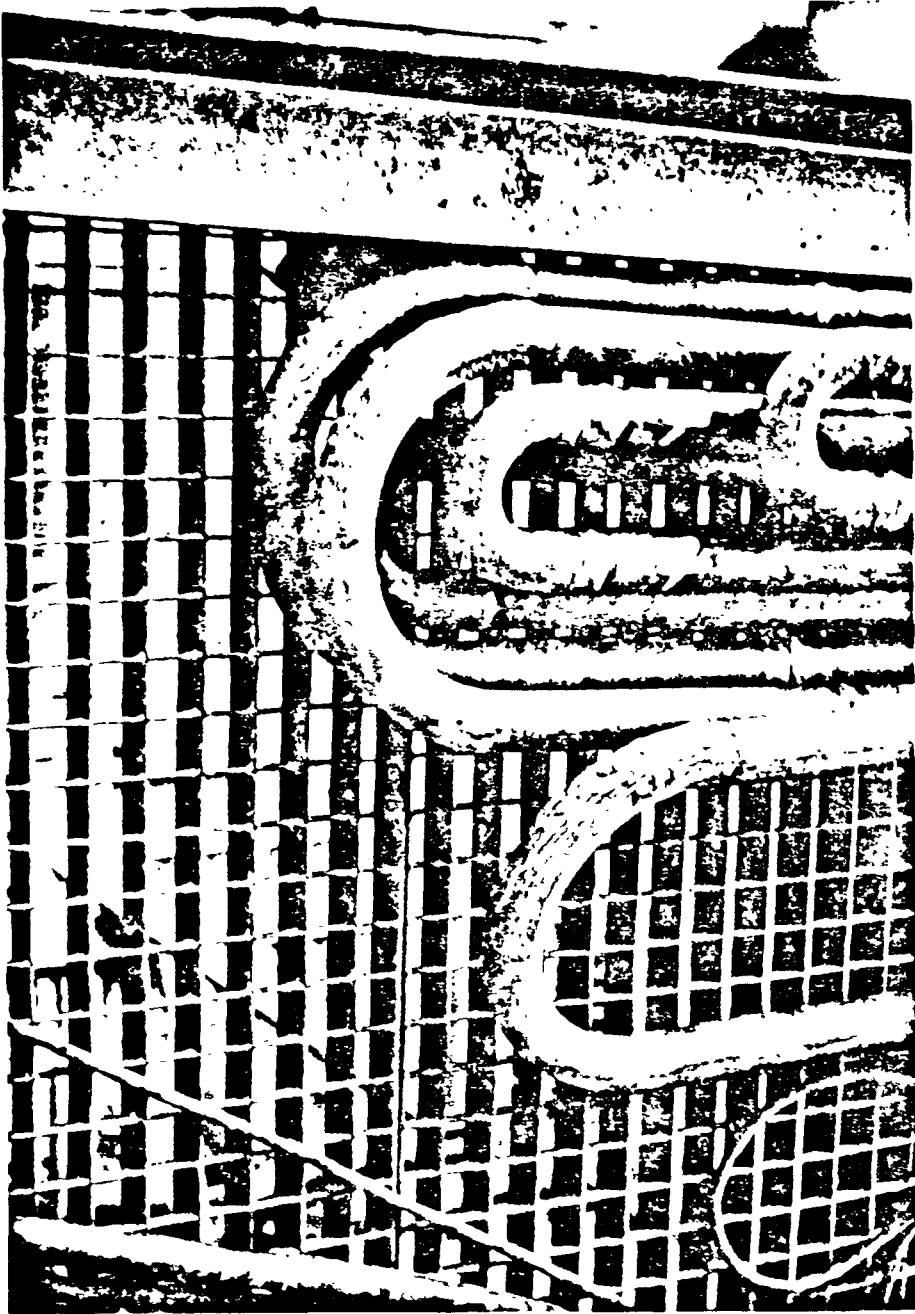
HARD COATING ON BENDS OF SUPERHEATER TUBES TO BE INSTALLED IN THE SECOND PASS OF BOILER NO. 5 (Photographed on May 17, 1977)
